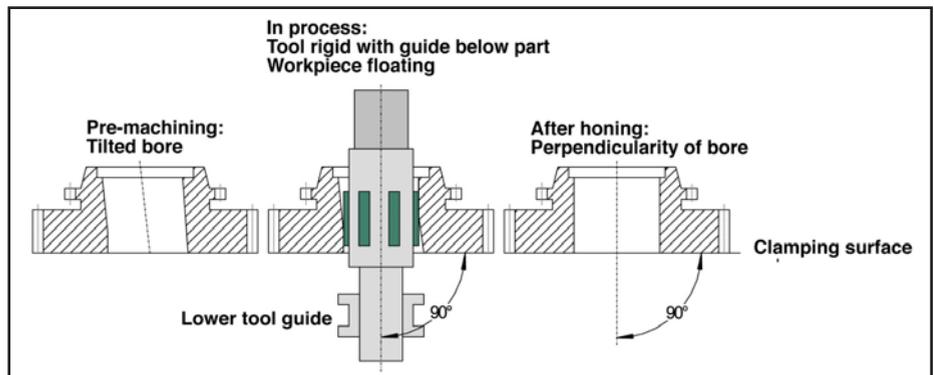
Machining principle for position correction of gear wheel bores in gear wheels.
